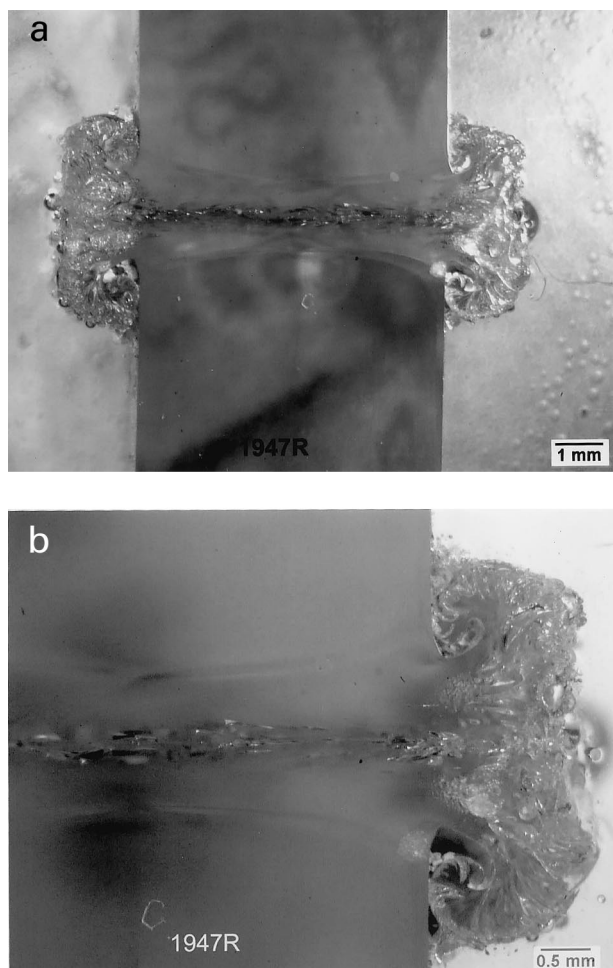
Macrograph of weld zone in a 6.2-mm thick specimen welded at a hot-tool temperature of 365°C, a melt time of 20 s, melt and weld penetrations of 0.13 and 0.66 mm, respectively, and a seal time of 10 s. (a) Full view of HAZ and weld bead. (b) Close up showing bubbles in the HAZ core and detailed structure of bead.
